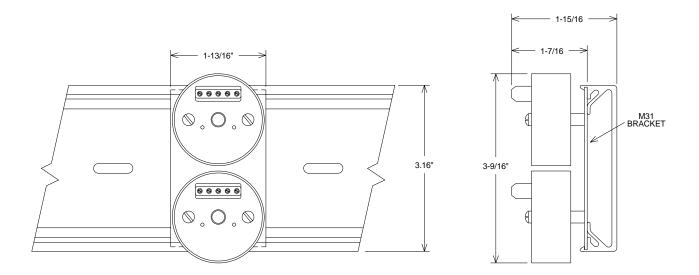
Assembly of the 18-812 Transmitter into the SnapTrack Mounting Rail
